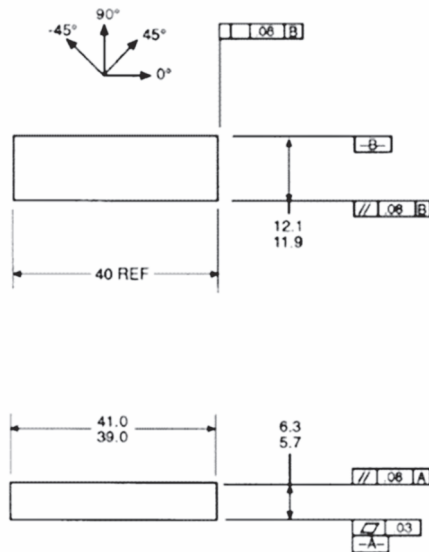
Short-beam shear bending test specimen model according to ASTM D2344 [28]
